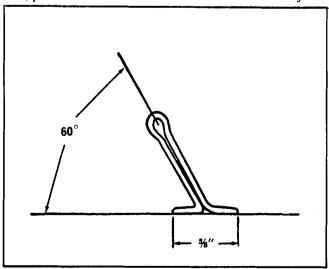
Tool for Removing Upper Half of Main Bearing
